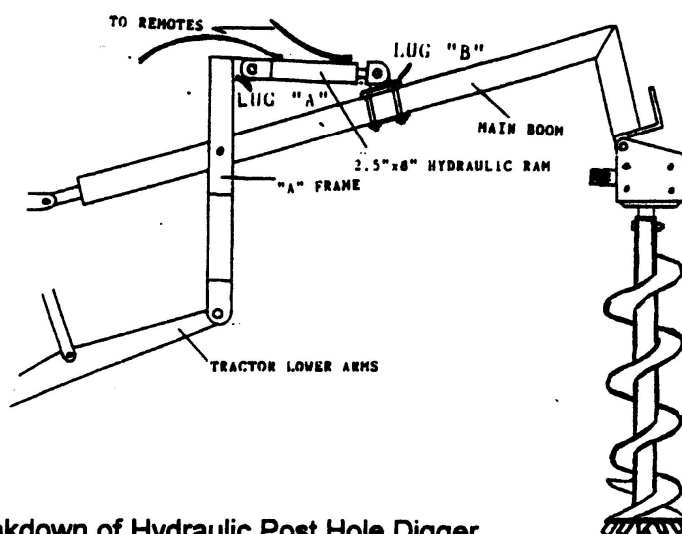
Breakdown of Hydraulic Post Hole Digger
